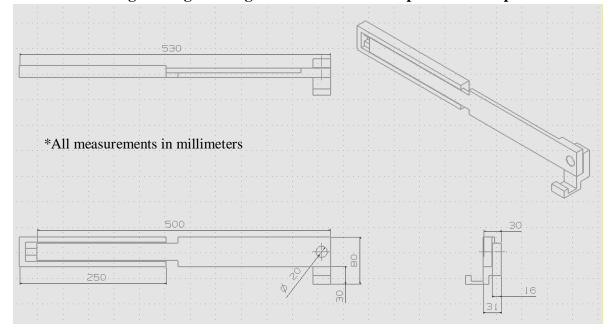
Assembly drawing of the extendable wiper arm concept (starting, and fully extended positions)
